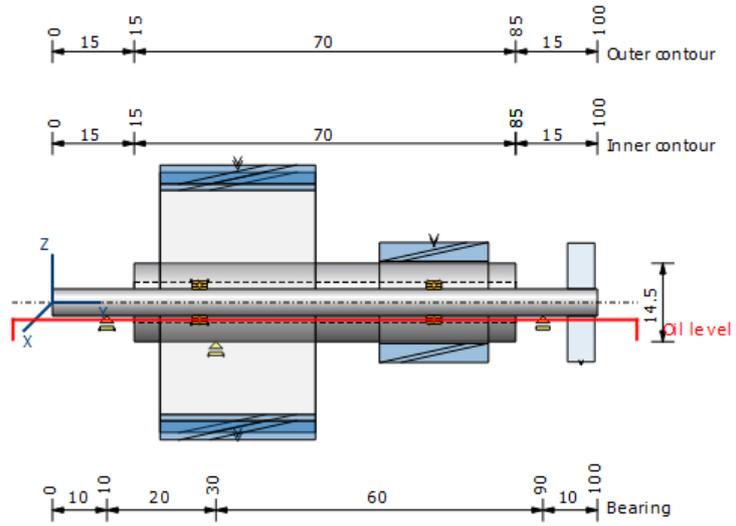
Sketch of the stepped planet shaft for the two-speed transmission
